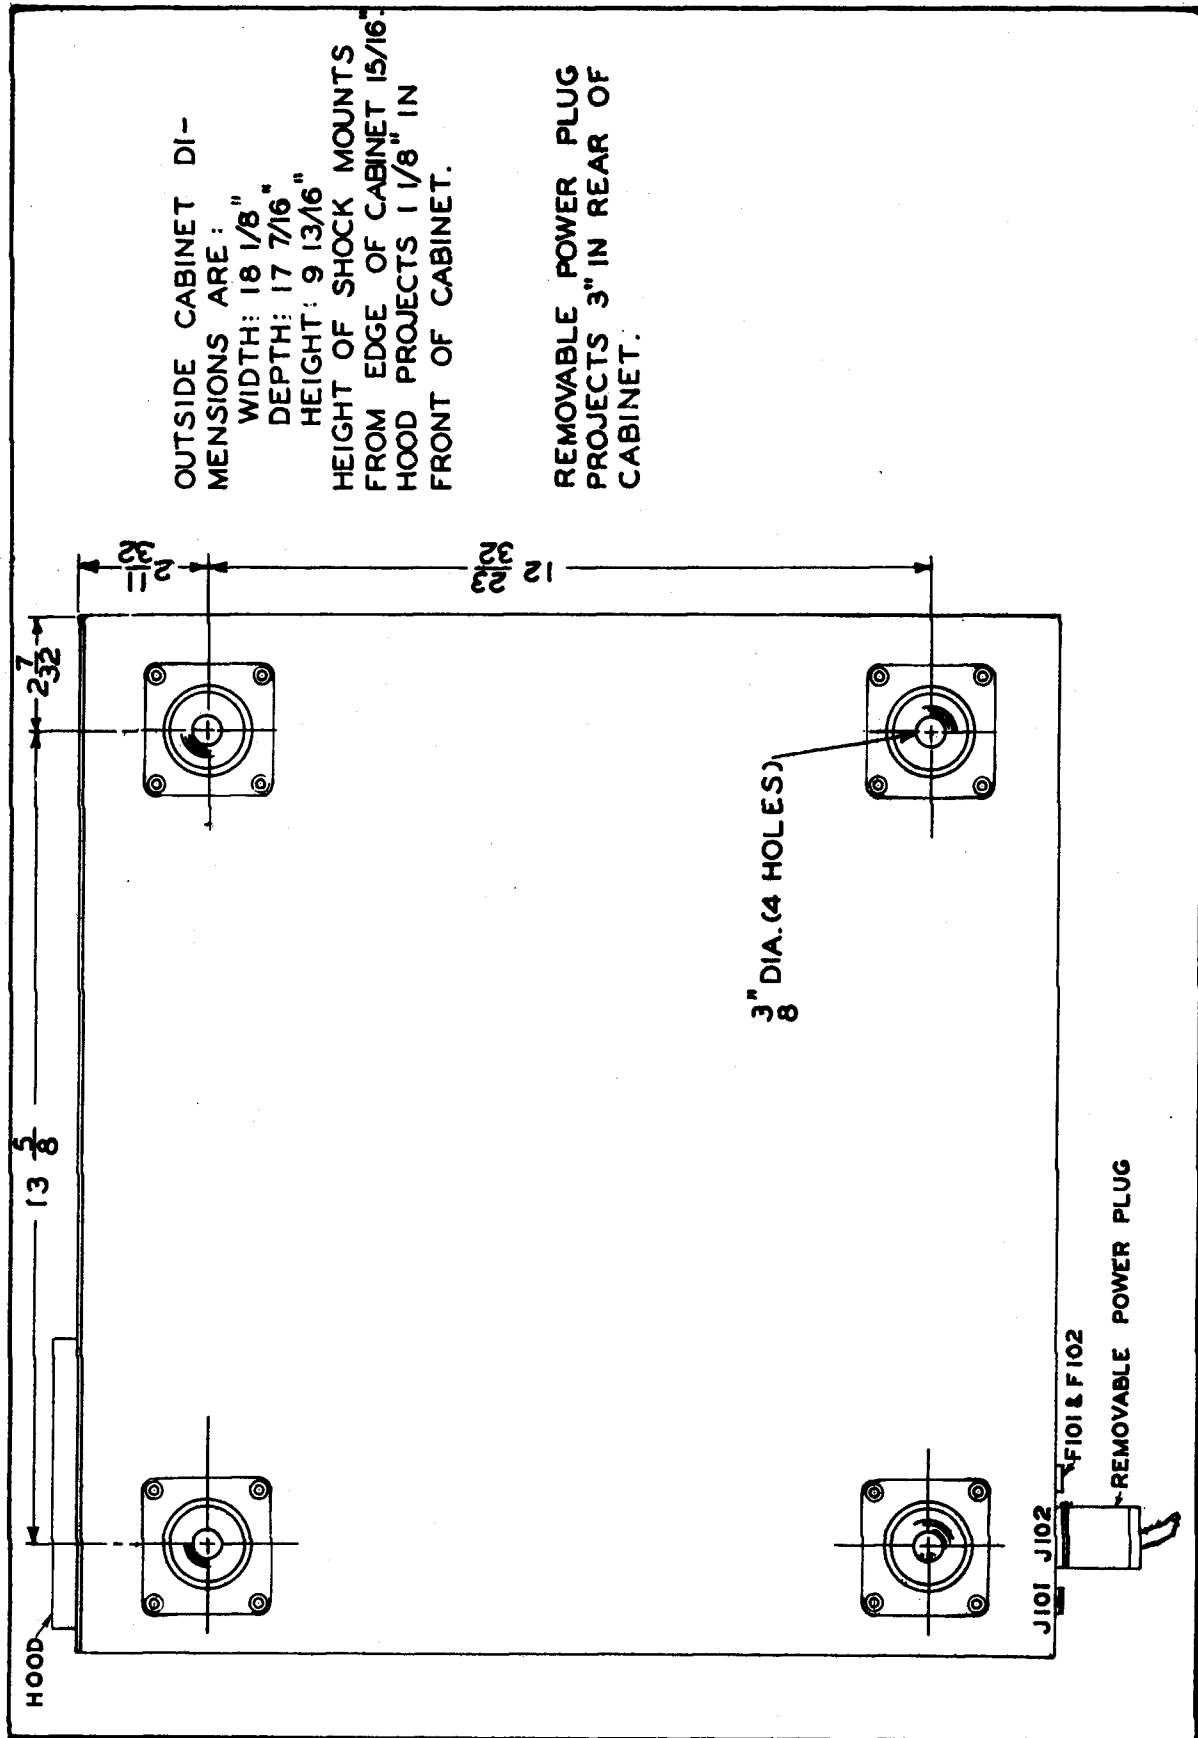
Navy Model RDP, Mounting Dimensions
